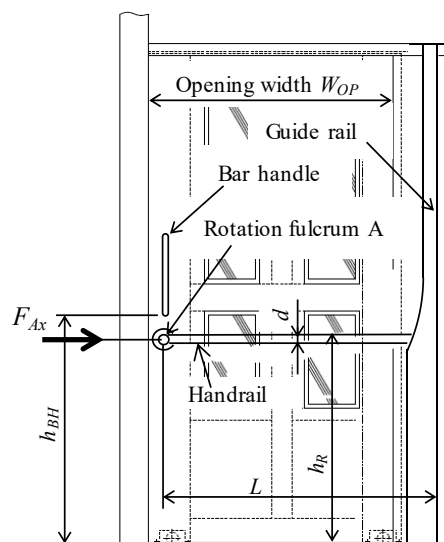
Outline of sliding door equipment with retractable handrail
